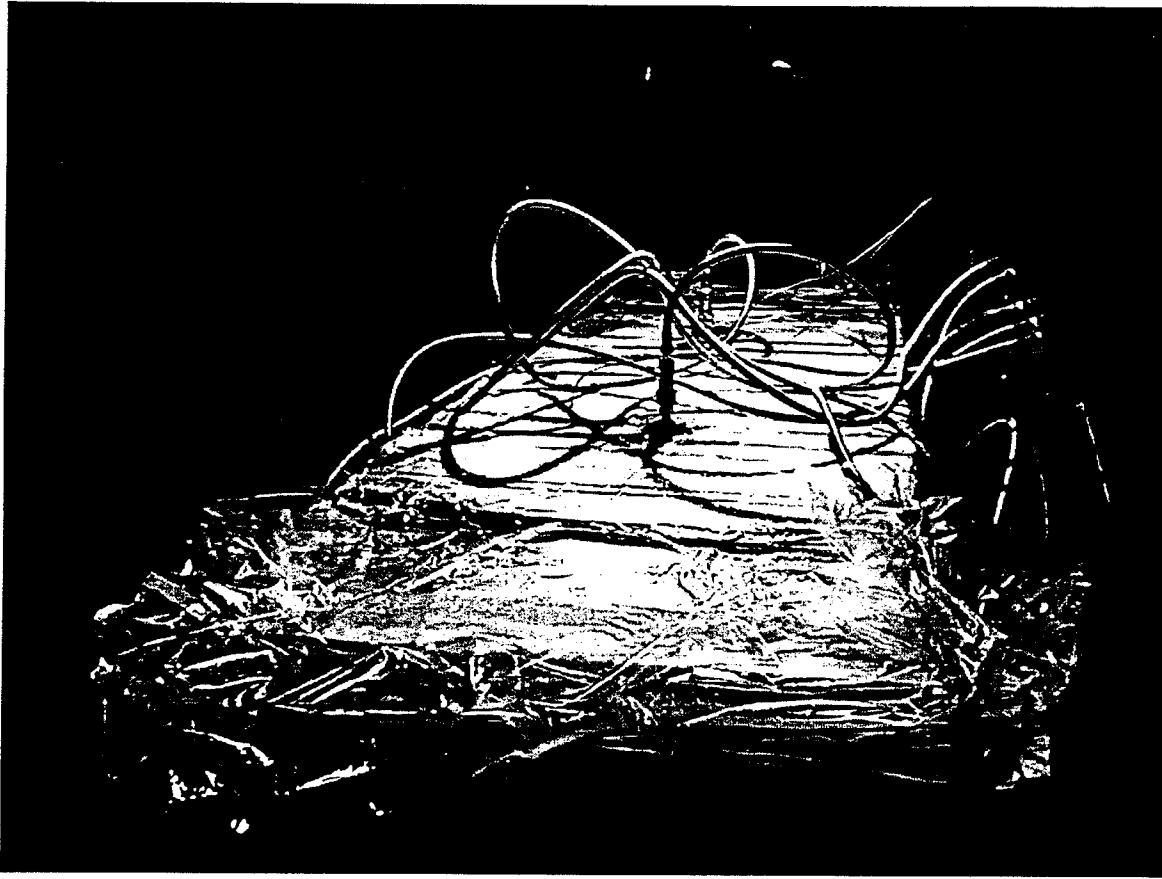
Six cell bridge inside the autoclave after complete assembly of the vacuum bag.
